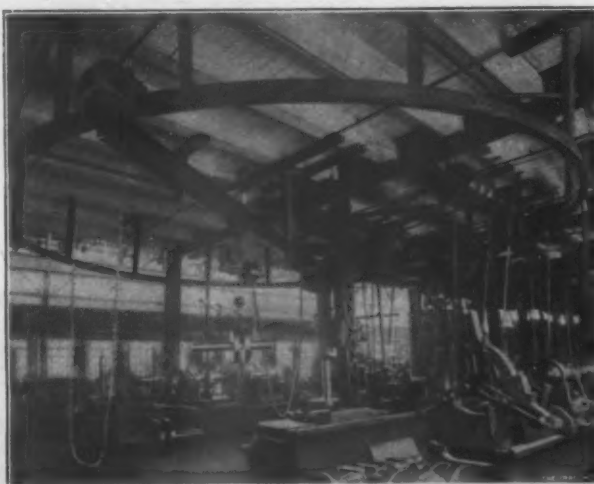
A Trolley Jib Crane of Original Design, Used in the Handling of Engine Parts to the Tools.
